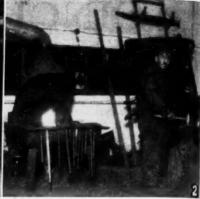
Corner of a typical welding shop. Fig. 2—The blacksmith's forge should be located in the welding shop.
